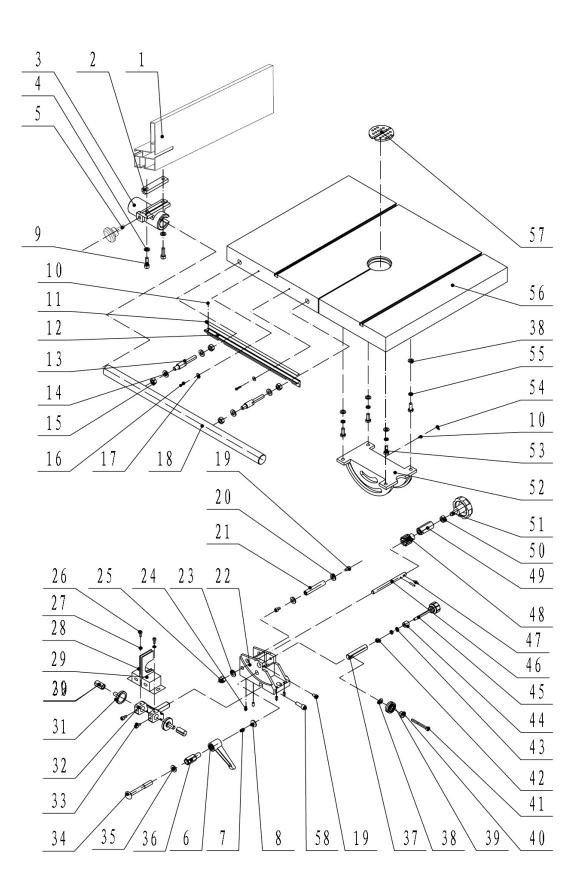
Spare parts drawing 2 - Wood Band Saw HBS 400
